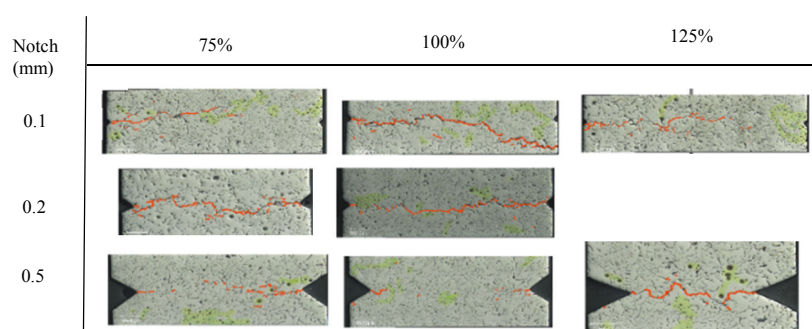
Abstract of TMF failures sorted by setup and notch size
